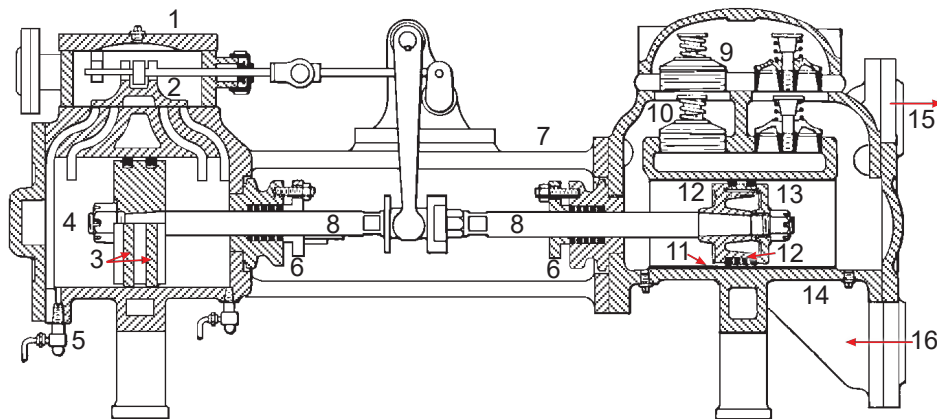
shows a reciprocating duplex pump, driven directly by a steam engine.
